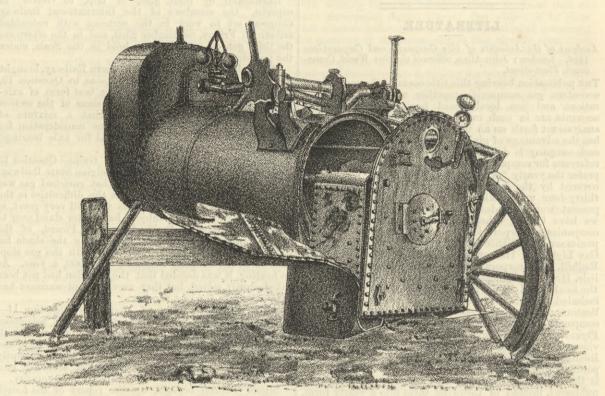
LEFT SIDE VIEW OF THE ENGINE AFTER THE EXPLOSION.
